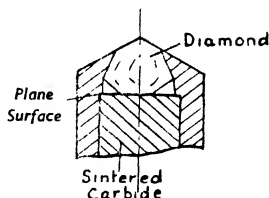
Improved form of hardness indenter placed on a sintered carbide block
